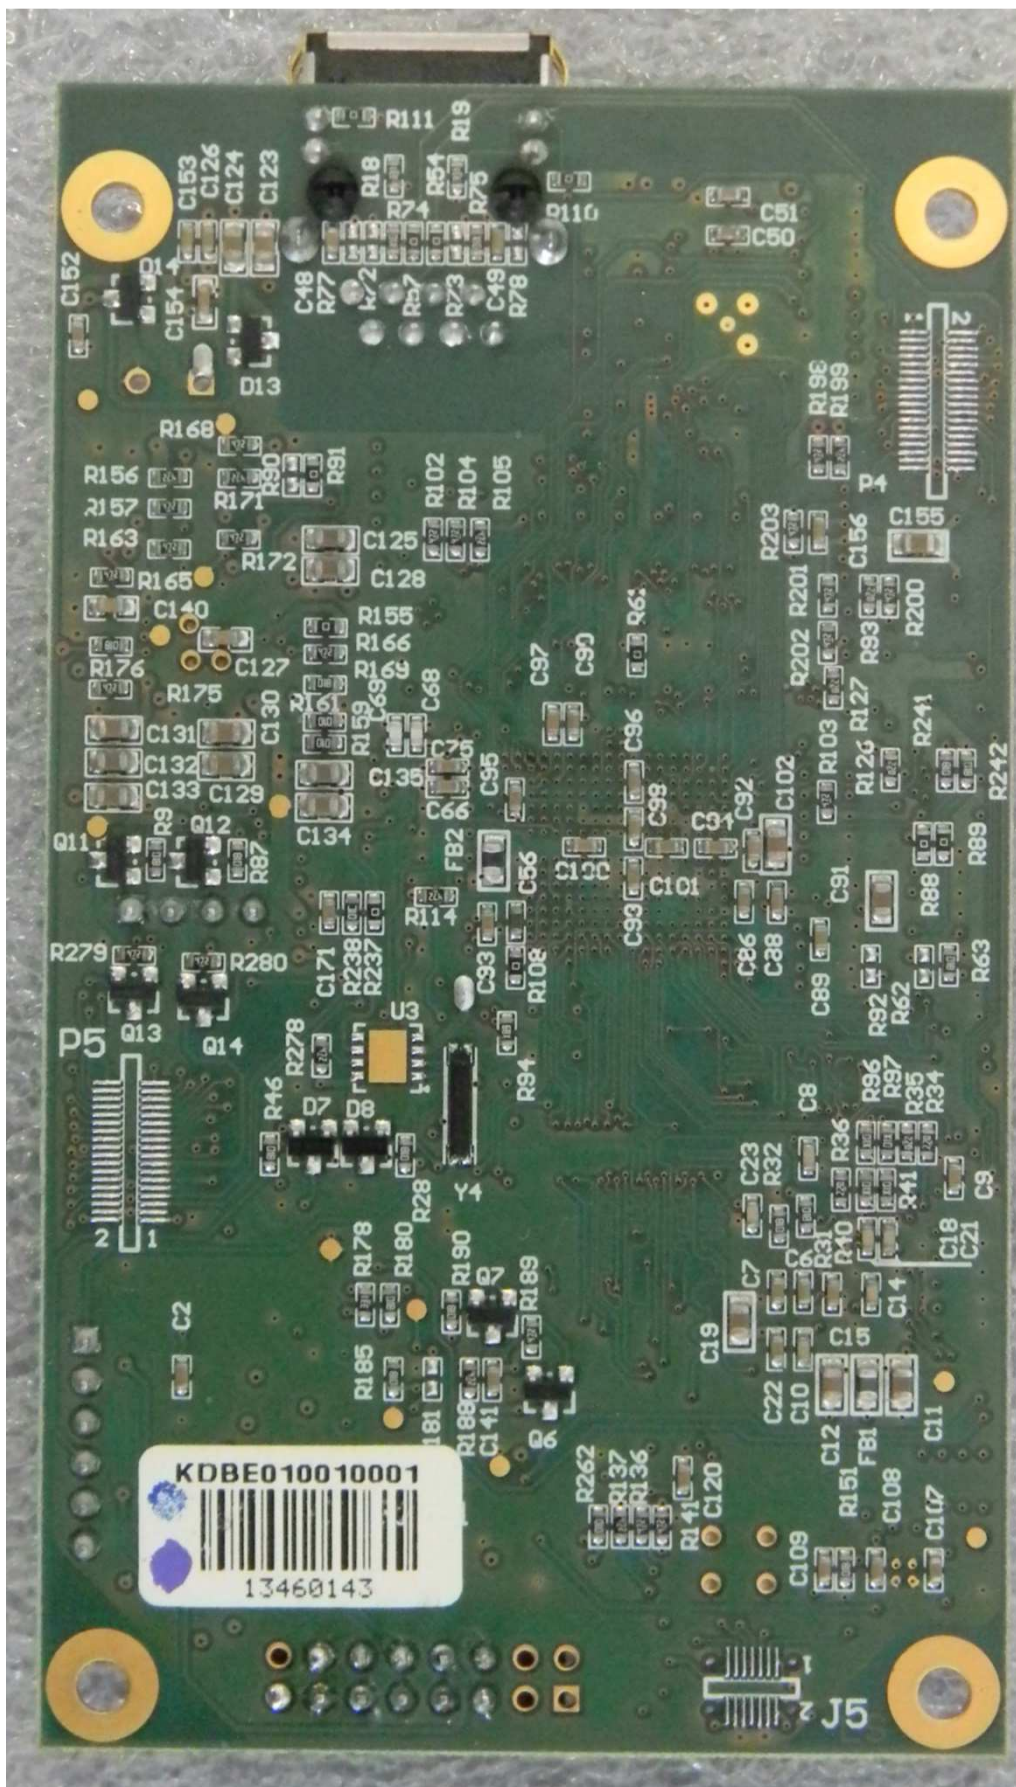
LEFT AND RIGHT BOARD FRONT VIEW
